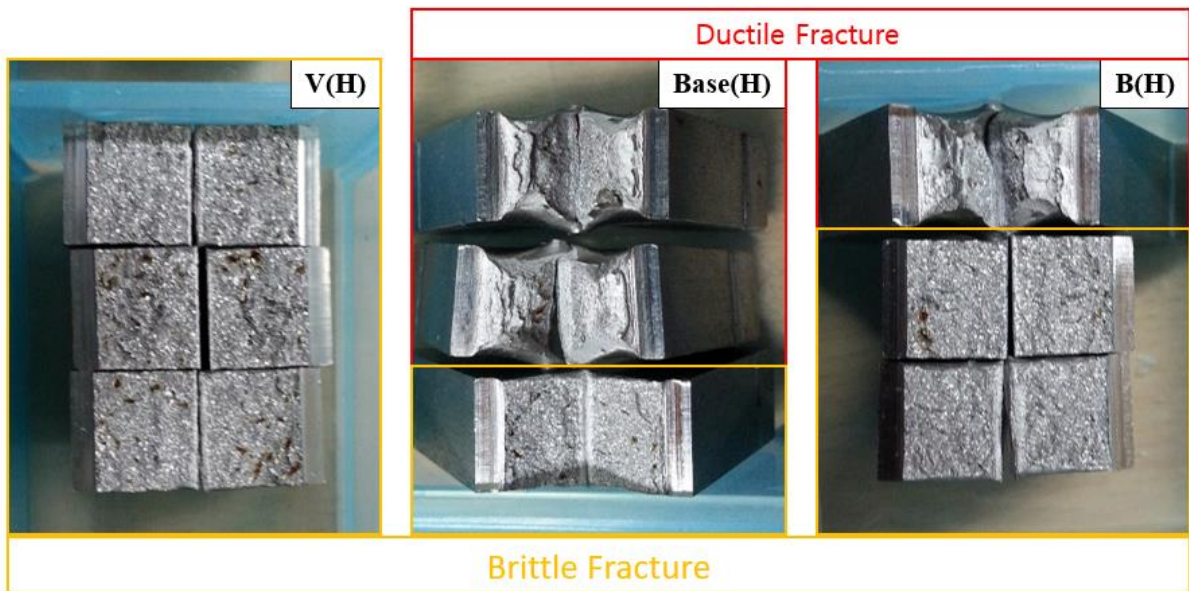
Fractographs of the fractured Charpy impact tests at -40°C for the HAZ specimens
